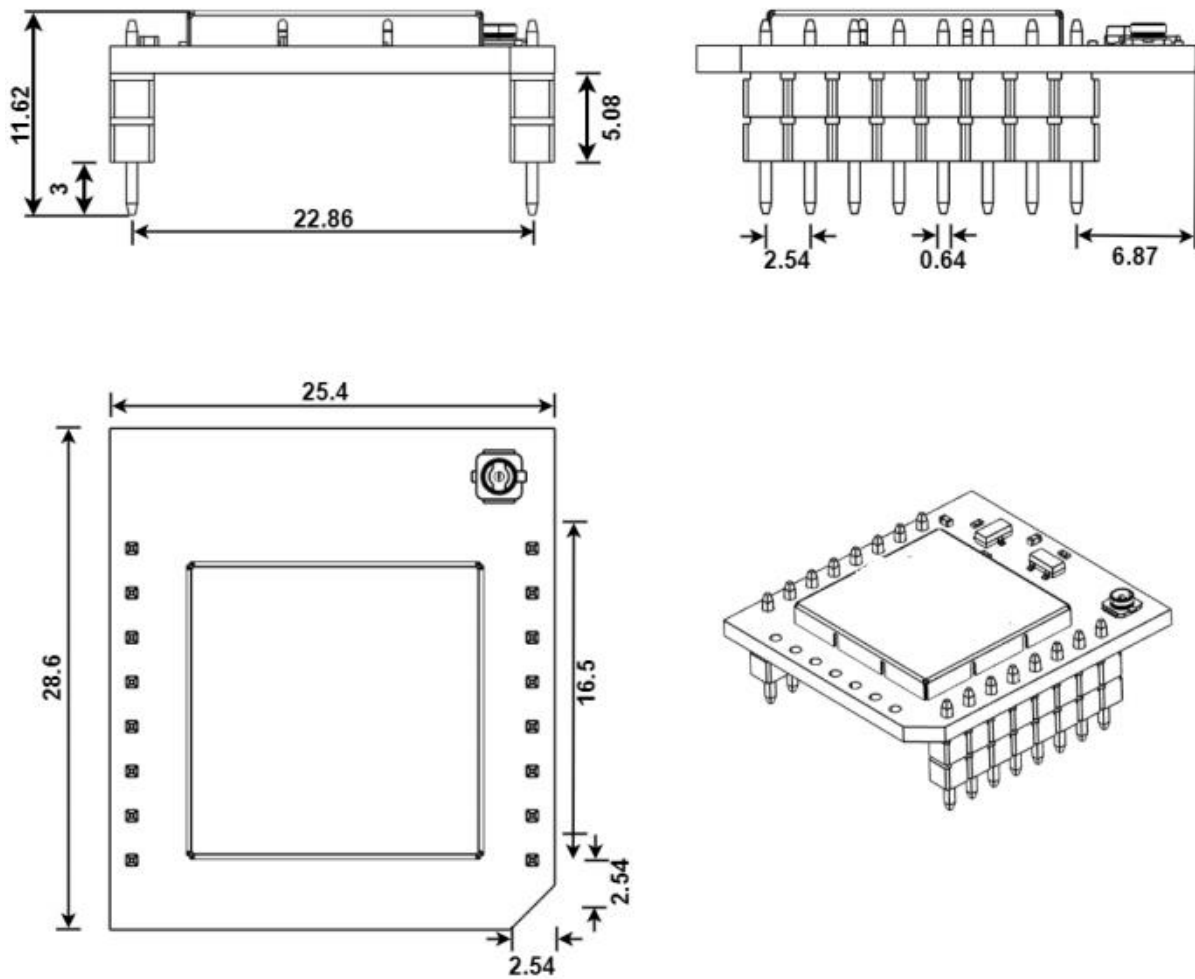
ZWave 700 Module - Dimensions (for mounting on female headers)
